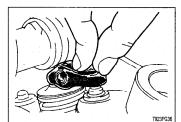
The rocker arms sit beneath the camshaft and are supported on one end by the valve stem and on the other end by the hydraulic lash adjuster—Diamante with 3.0L DOHC engine
